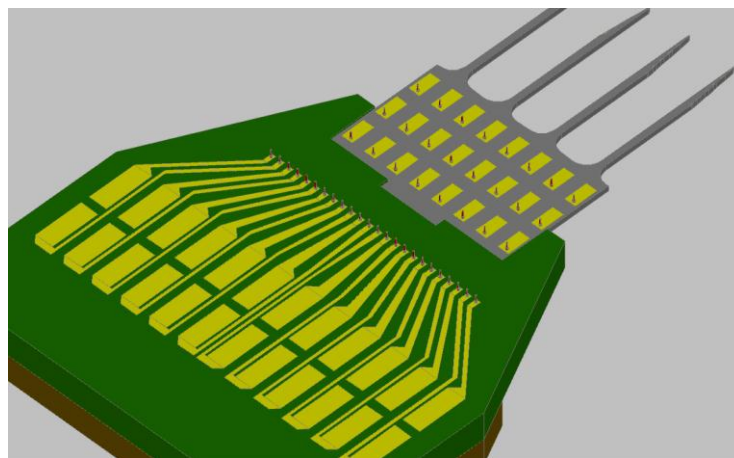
Carrier wafer for quad shaft electrode customized for Omnetics A79050 socket
